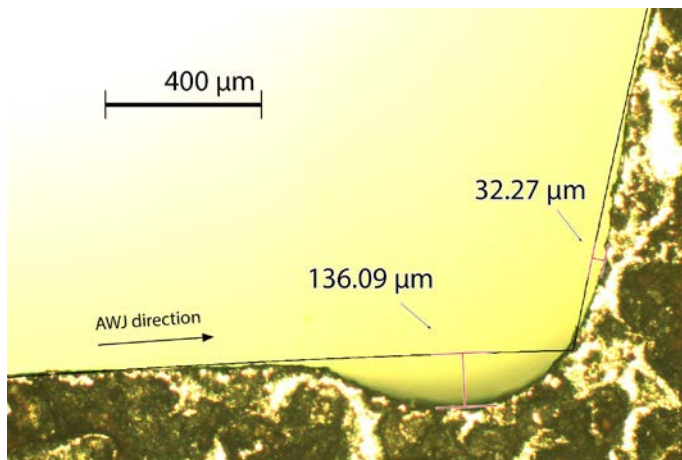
Figure H. Bottom geometry, feed rate 36 mm/s, undercut right side, gear B
